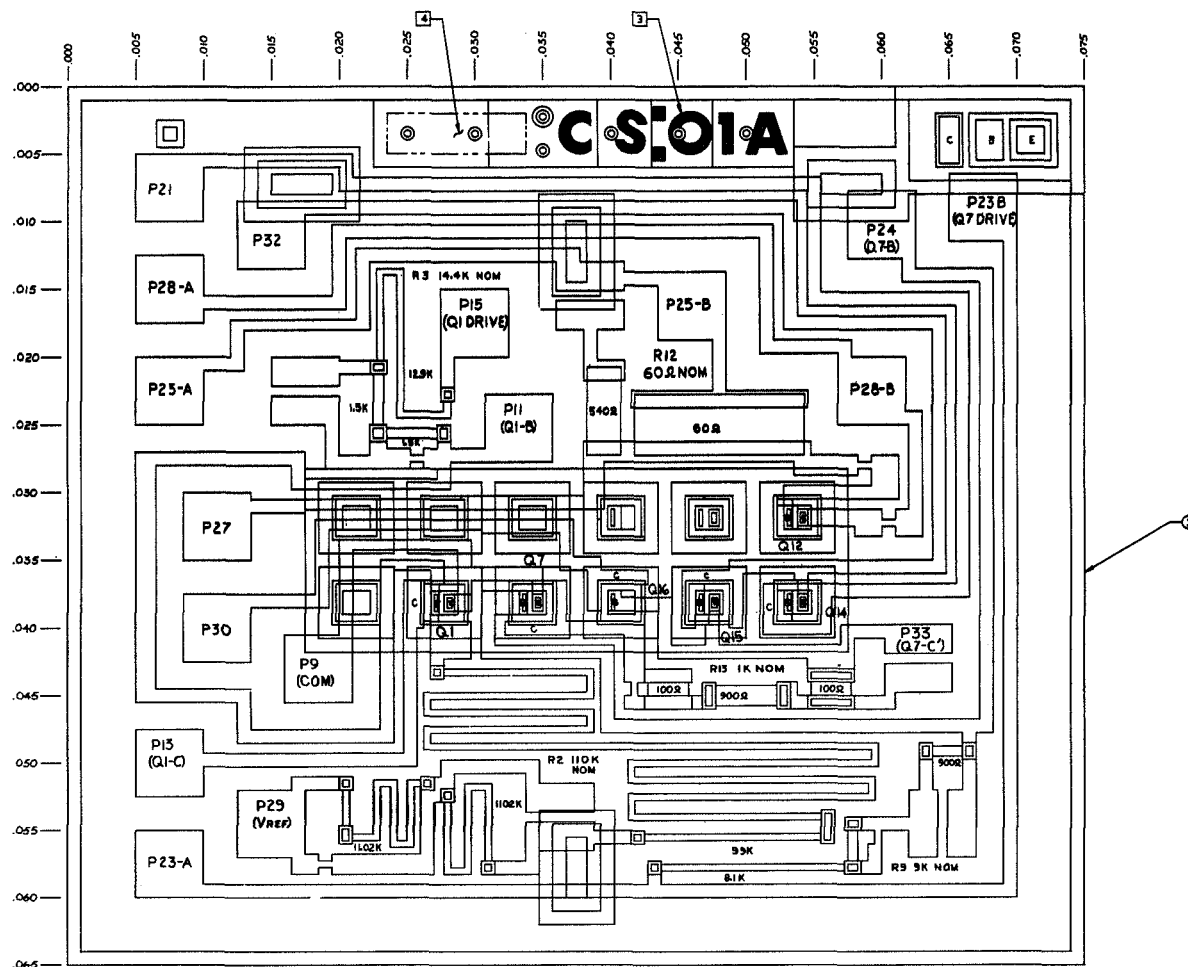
Converter Switch (CS01A) Assembly Drawing
